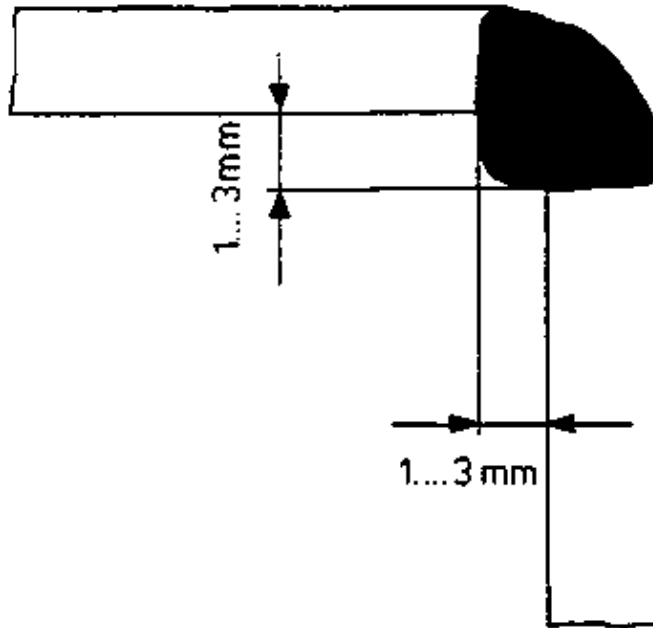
Welded Corner with a root height of 1 to 3 mm
